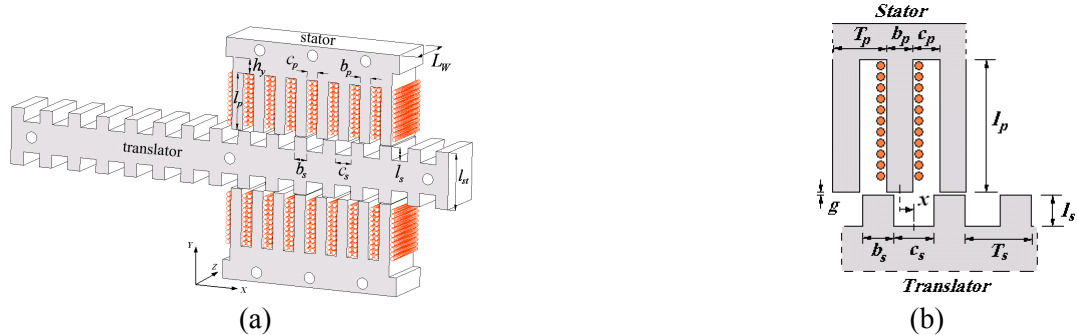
(a) 3D view of a double side LSRM and its main dimensions; (b) Details of the main dimensions
